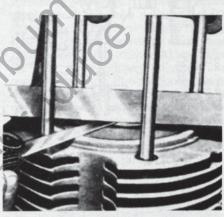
Measure piston height in cylinder and refer to text for cylinder head gasket thickness.
